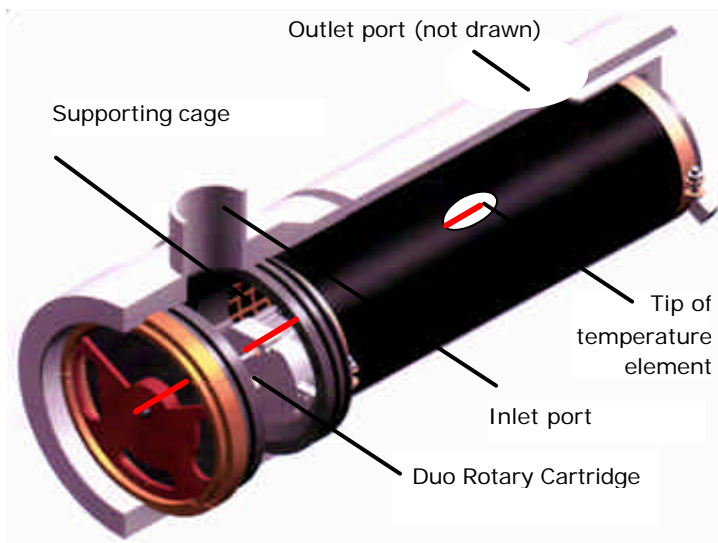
Exploded View of the 2nd generation Duo Rotary Piston Gas-meters with dampening membrane
